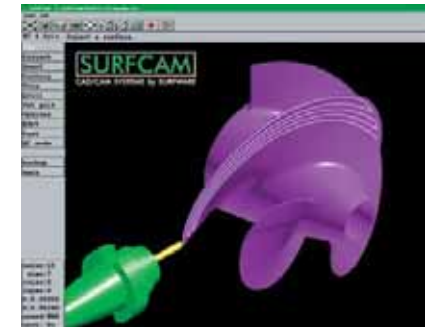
CAD/CAM programs use CAD-generated drawings to supply tool data for manufacturing processes. This display shows the generation of the cutter path for machining a personal watercraft impeller. (Courtesy of SURFCAM by Surfware)
